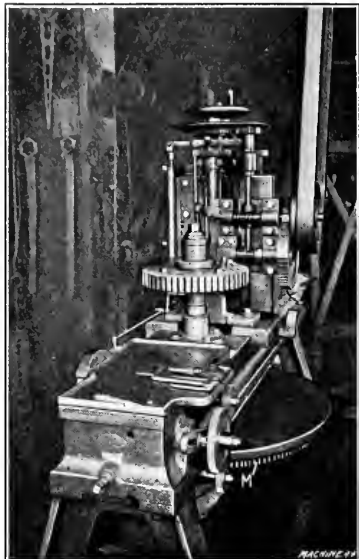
One of the Six Automatic Gear-cutting Machines built by R. Hoe & Co., patterned after the Freeland Machine
